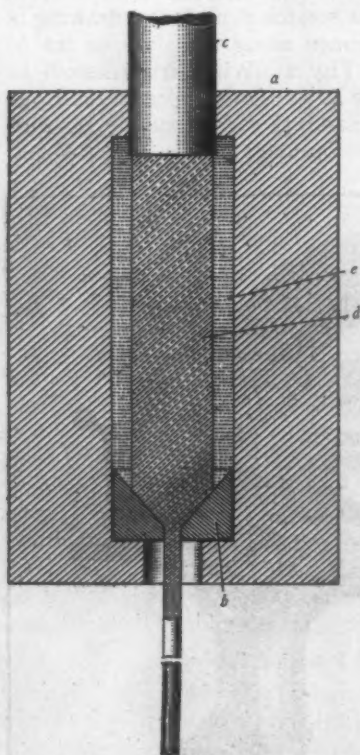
Apparatus Designed to Reduce the Friction Occurring During Extrusion.
